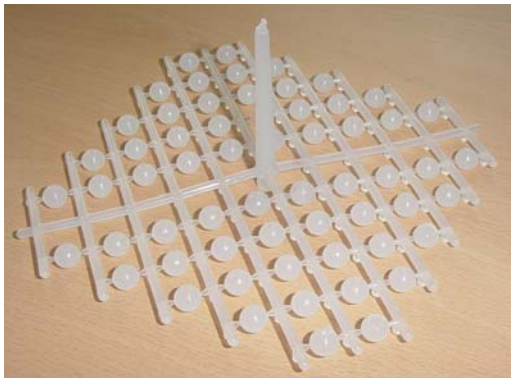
Injection molded polyethylene product involving sprue, runner, gate and cavity
